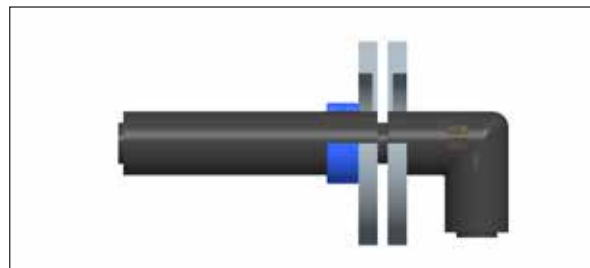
Step 6: Welding process / cooling time of inner pipe
